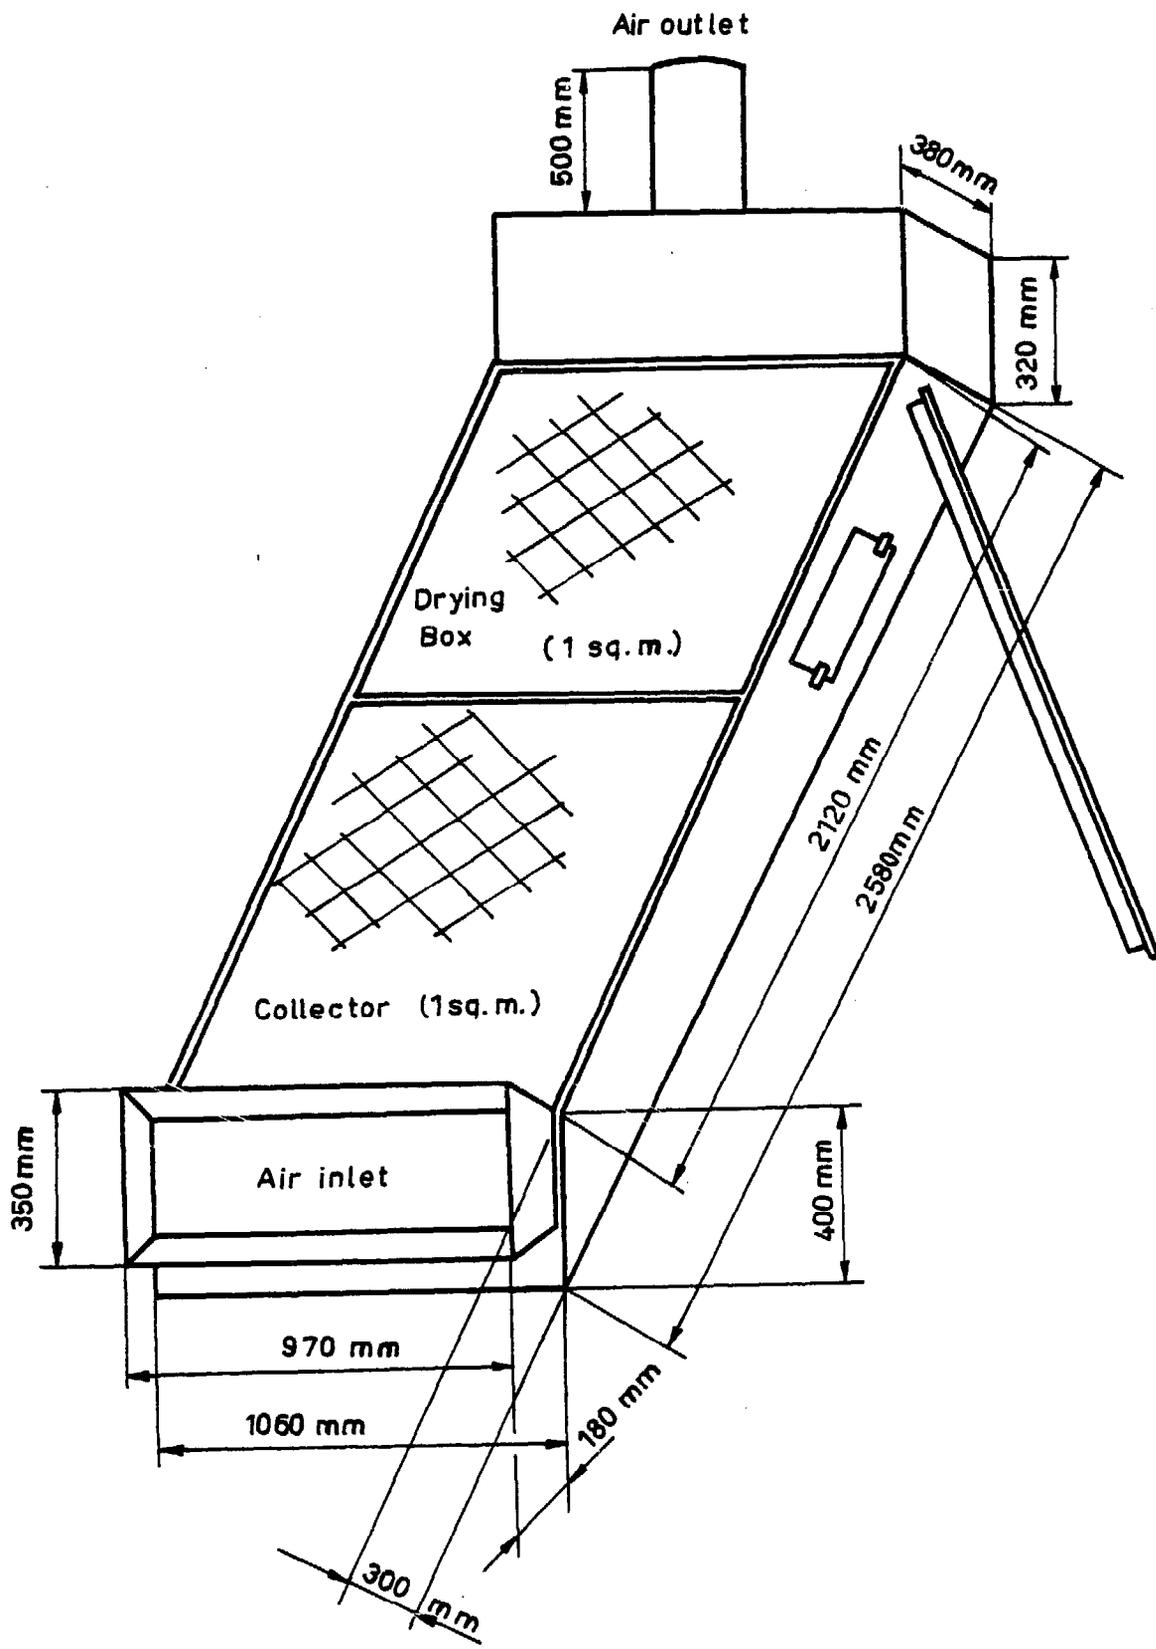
GENERAL VIEW AND DIMENSIONS
